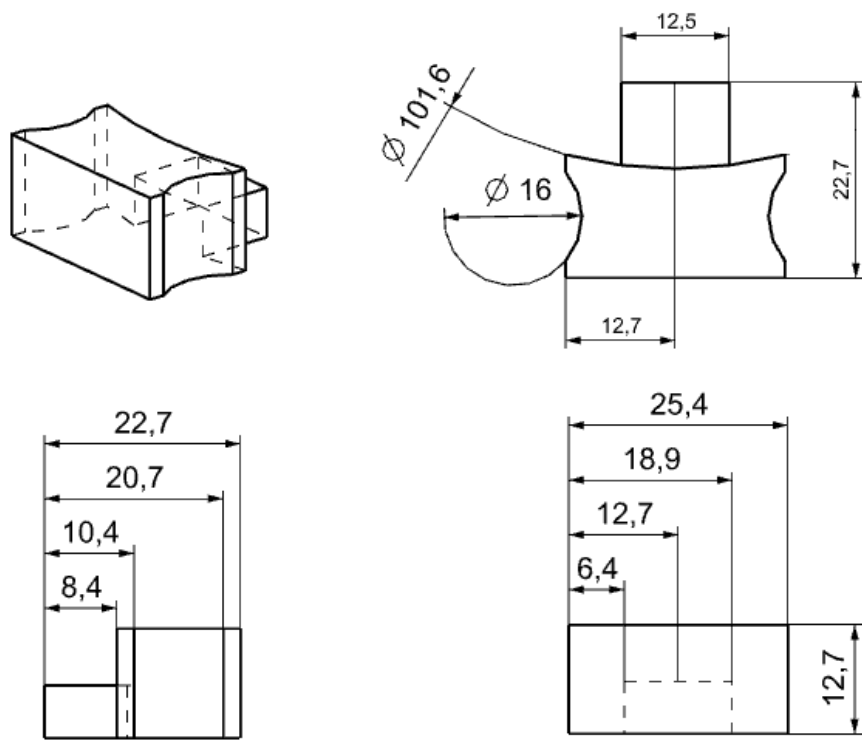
Schematic drawing of the projector light guide mount, all dimensions are shown in mm.
